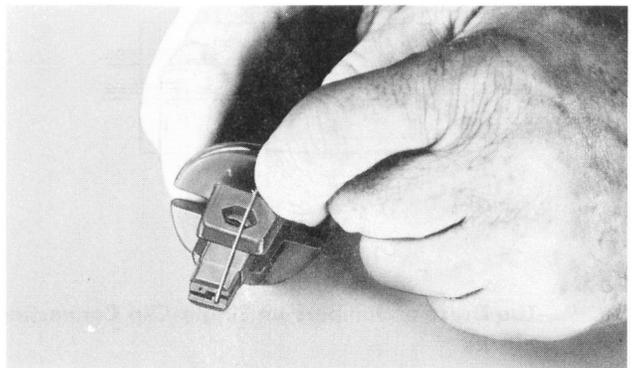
Proper Method of Holding 714E2 or 756D Tool
